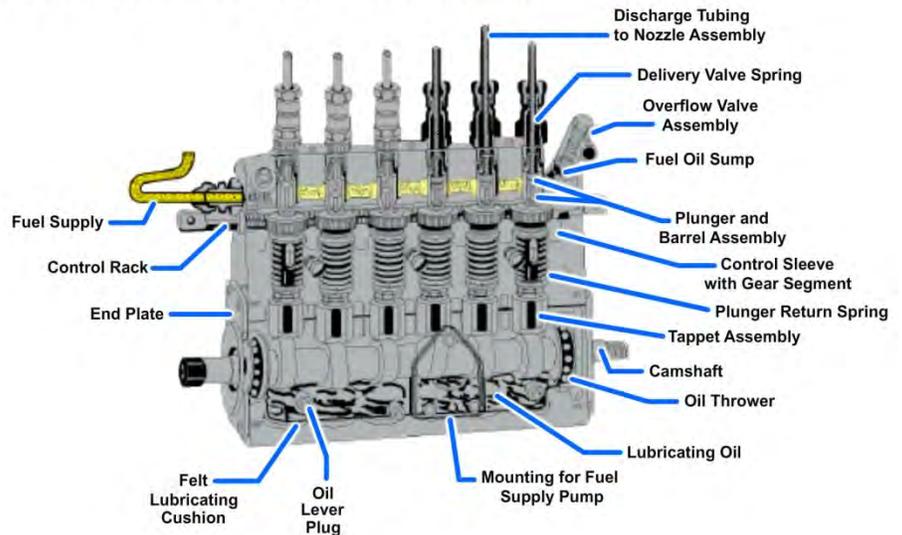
Bosch APE fuel supply system and fuel injection pump.
